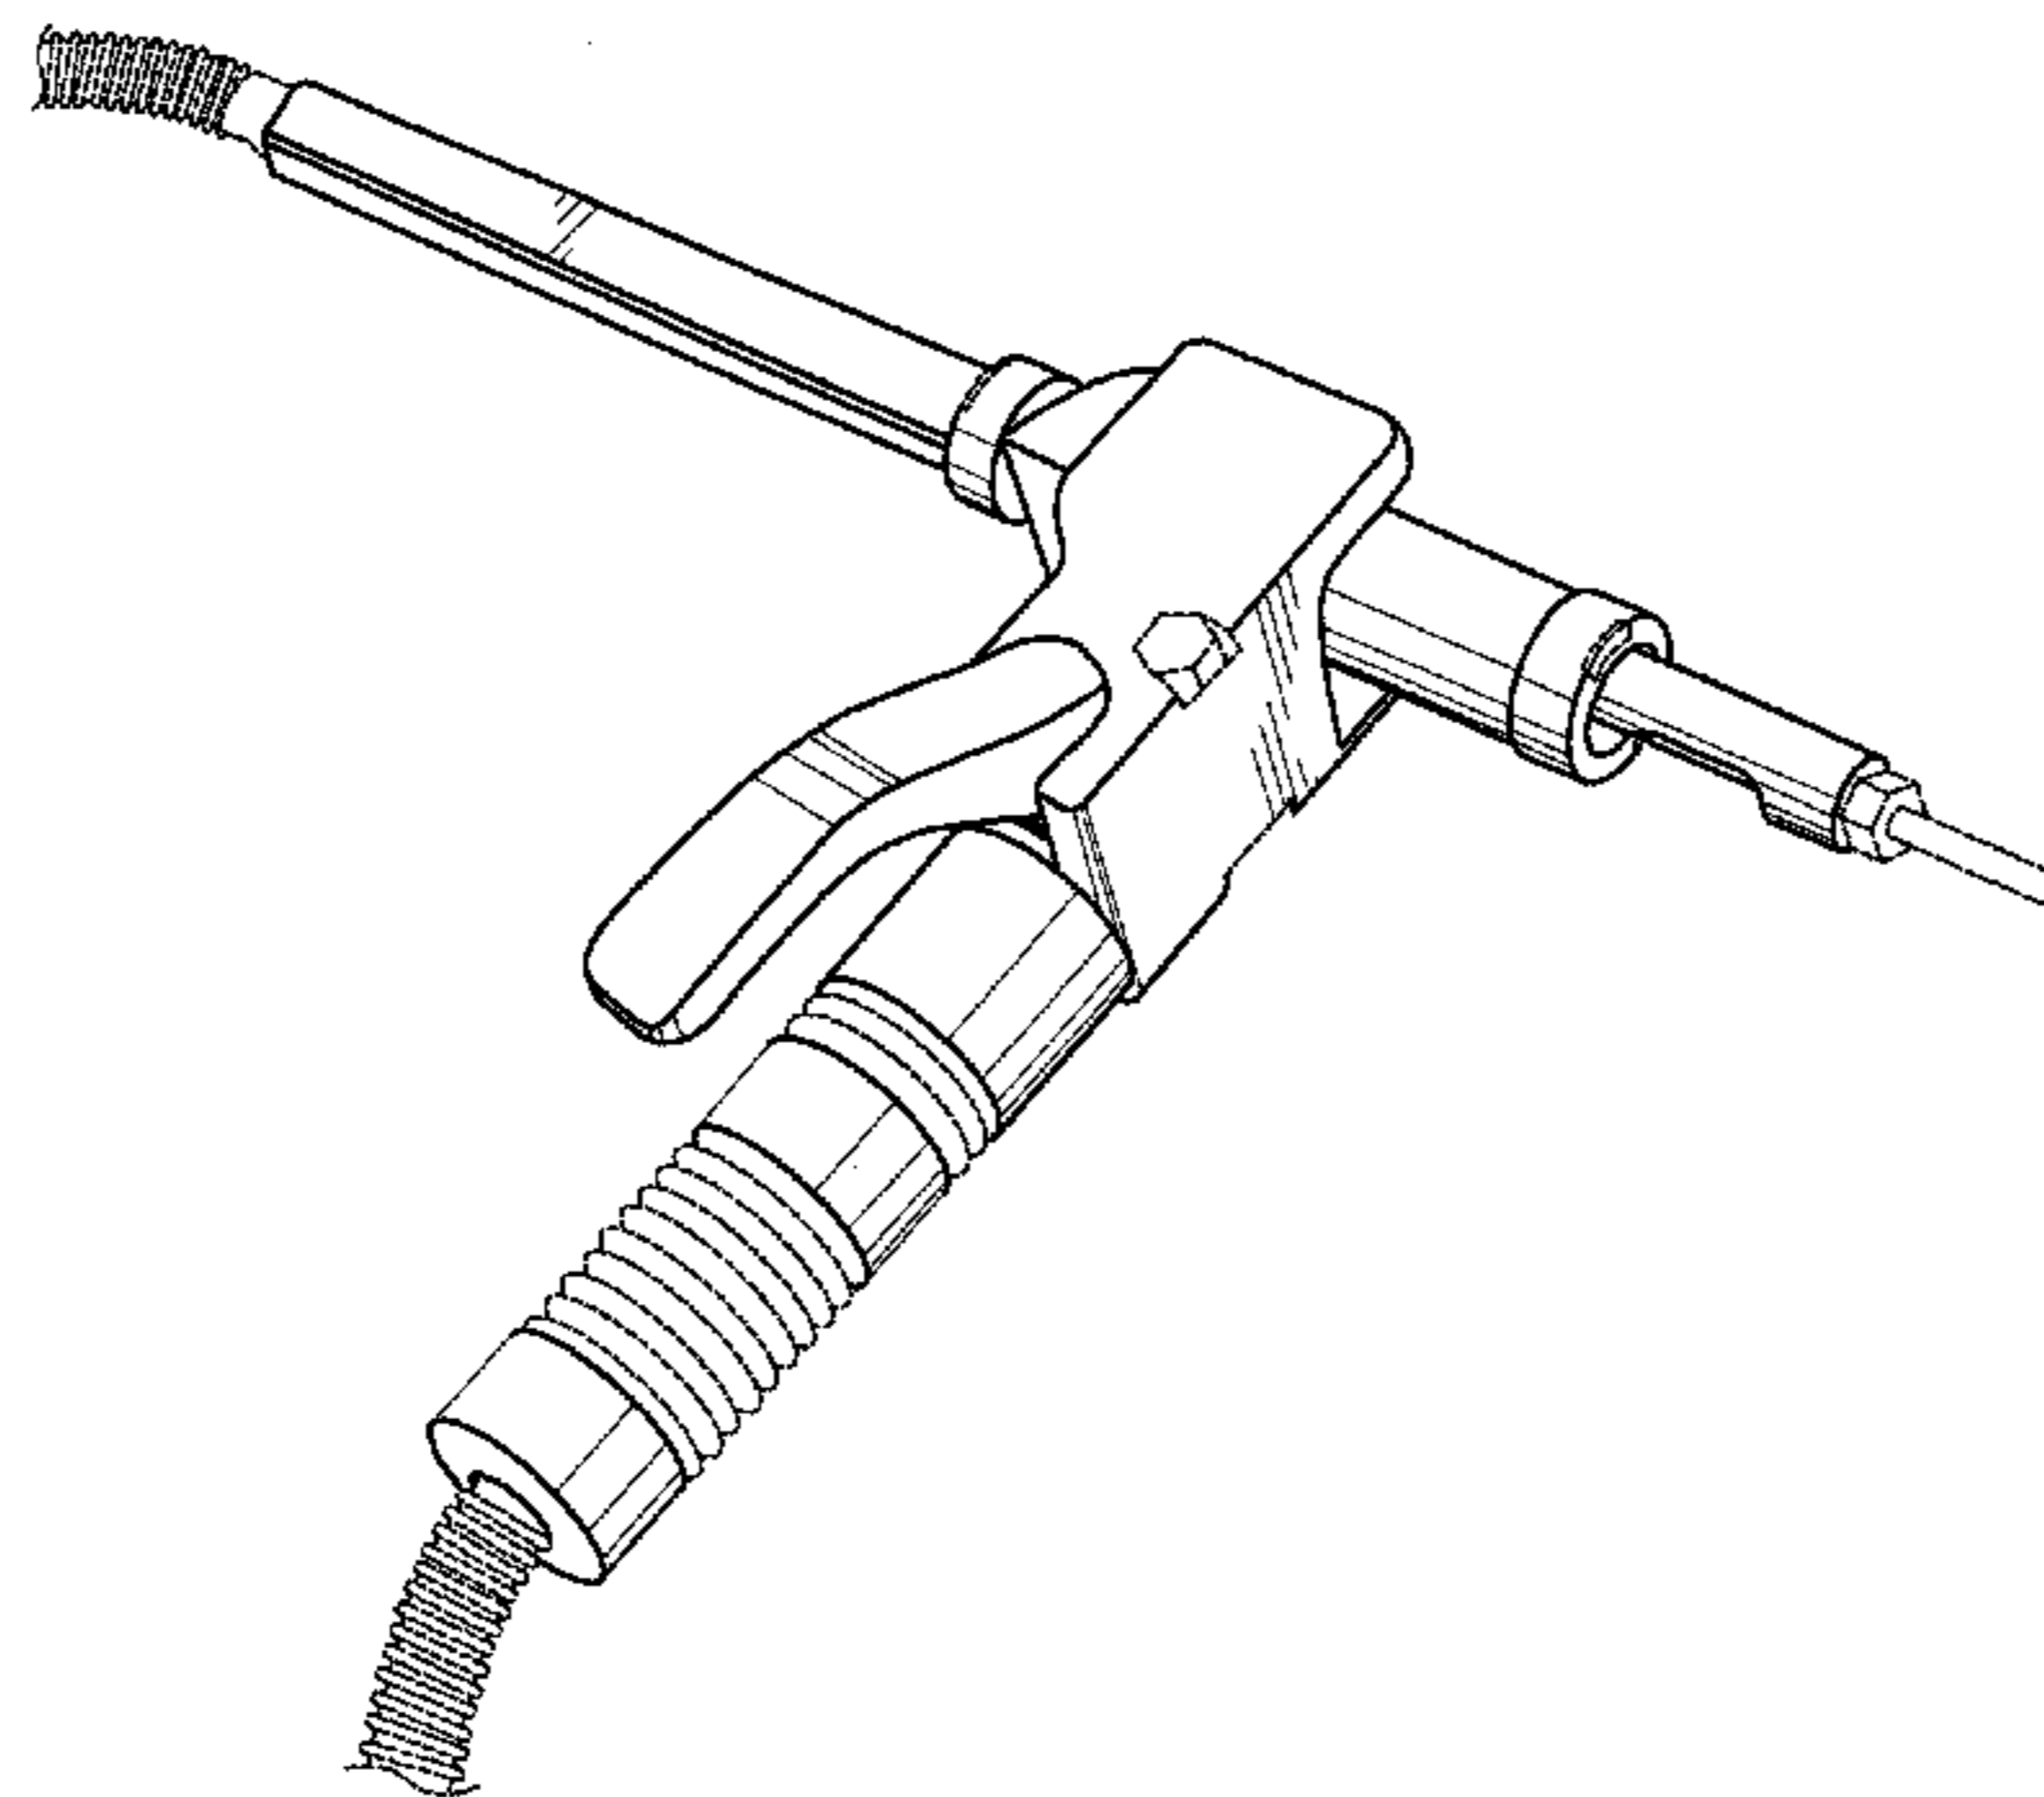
is a right side view of the welding electrode holder of the embodiment illustrated in FIG. 7;
